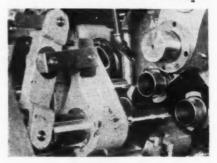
Special Accelerating Attachment. Hold back bracket stops top of lever. Forward action of main tool slide transmitted through the boring bar spindle mounting and linkage to lever accelerates motion of boring spindle to α faster feed per revolution than that of the main tool slide.
